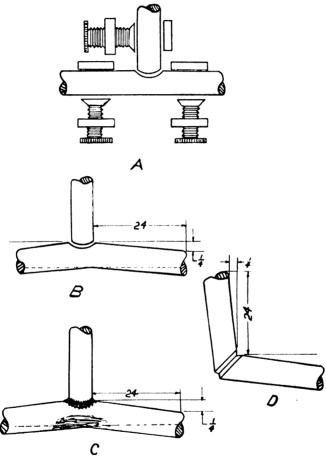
Methods of aligning pipe while welding: A. Pipe in fixture, B. Prebent pipe, C. The shaded portion indicates the place to reheat the pipe if it buckles during the welding, D. The amount to set an elbow joint out of line to obtain a 90° bend after welding
